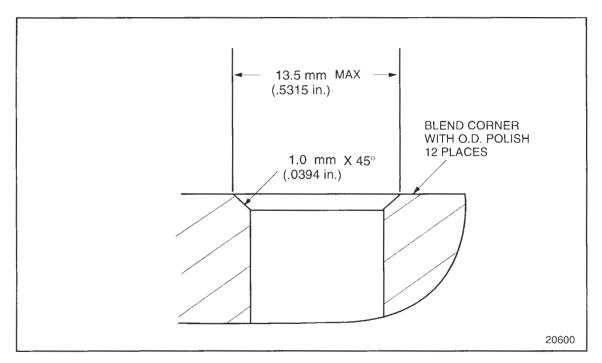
Main Journal Oil Hole Chamfer Limits
